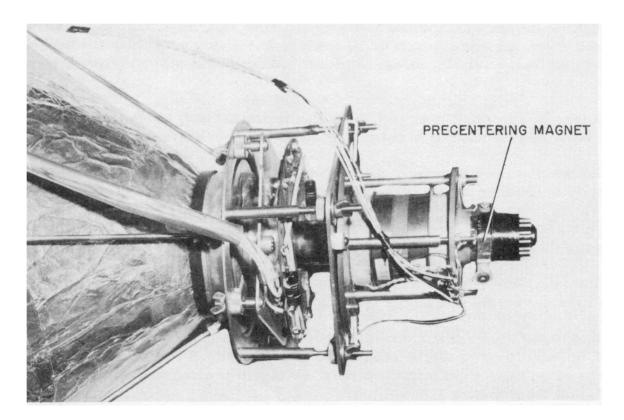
Complete Assembly Using Model 1285ES Support, Showing Precentering Magnet in Place
